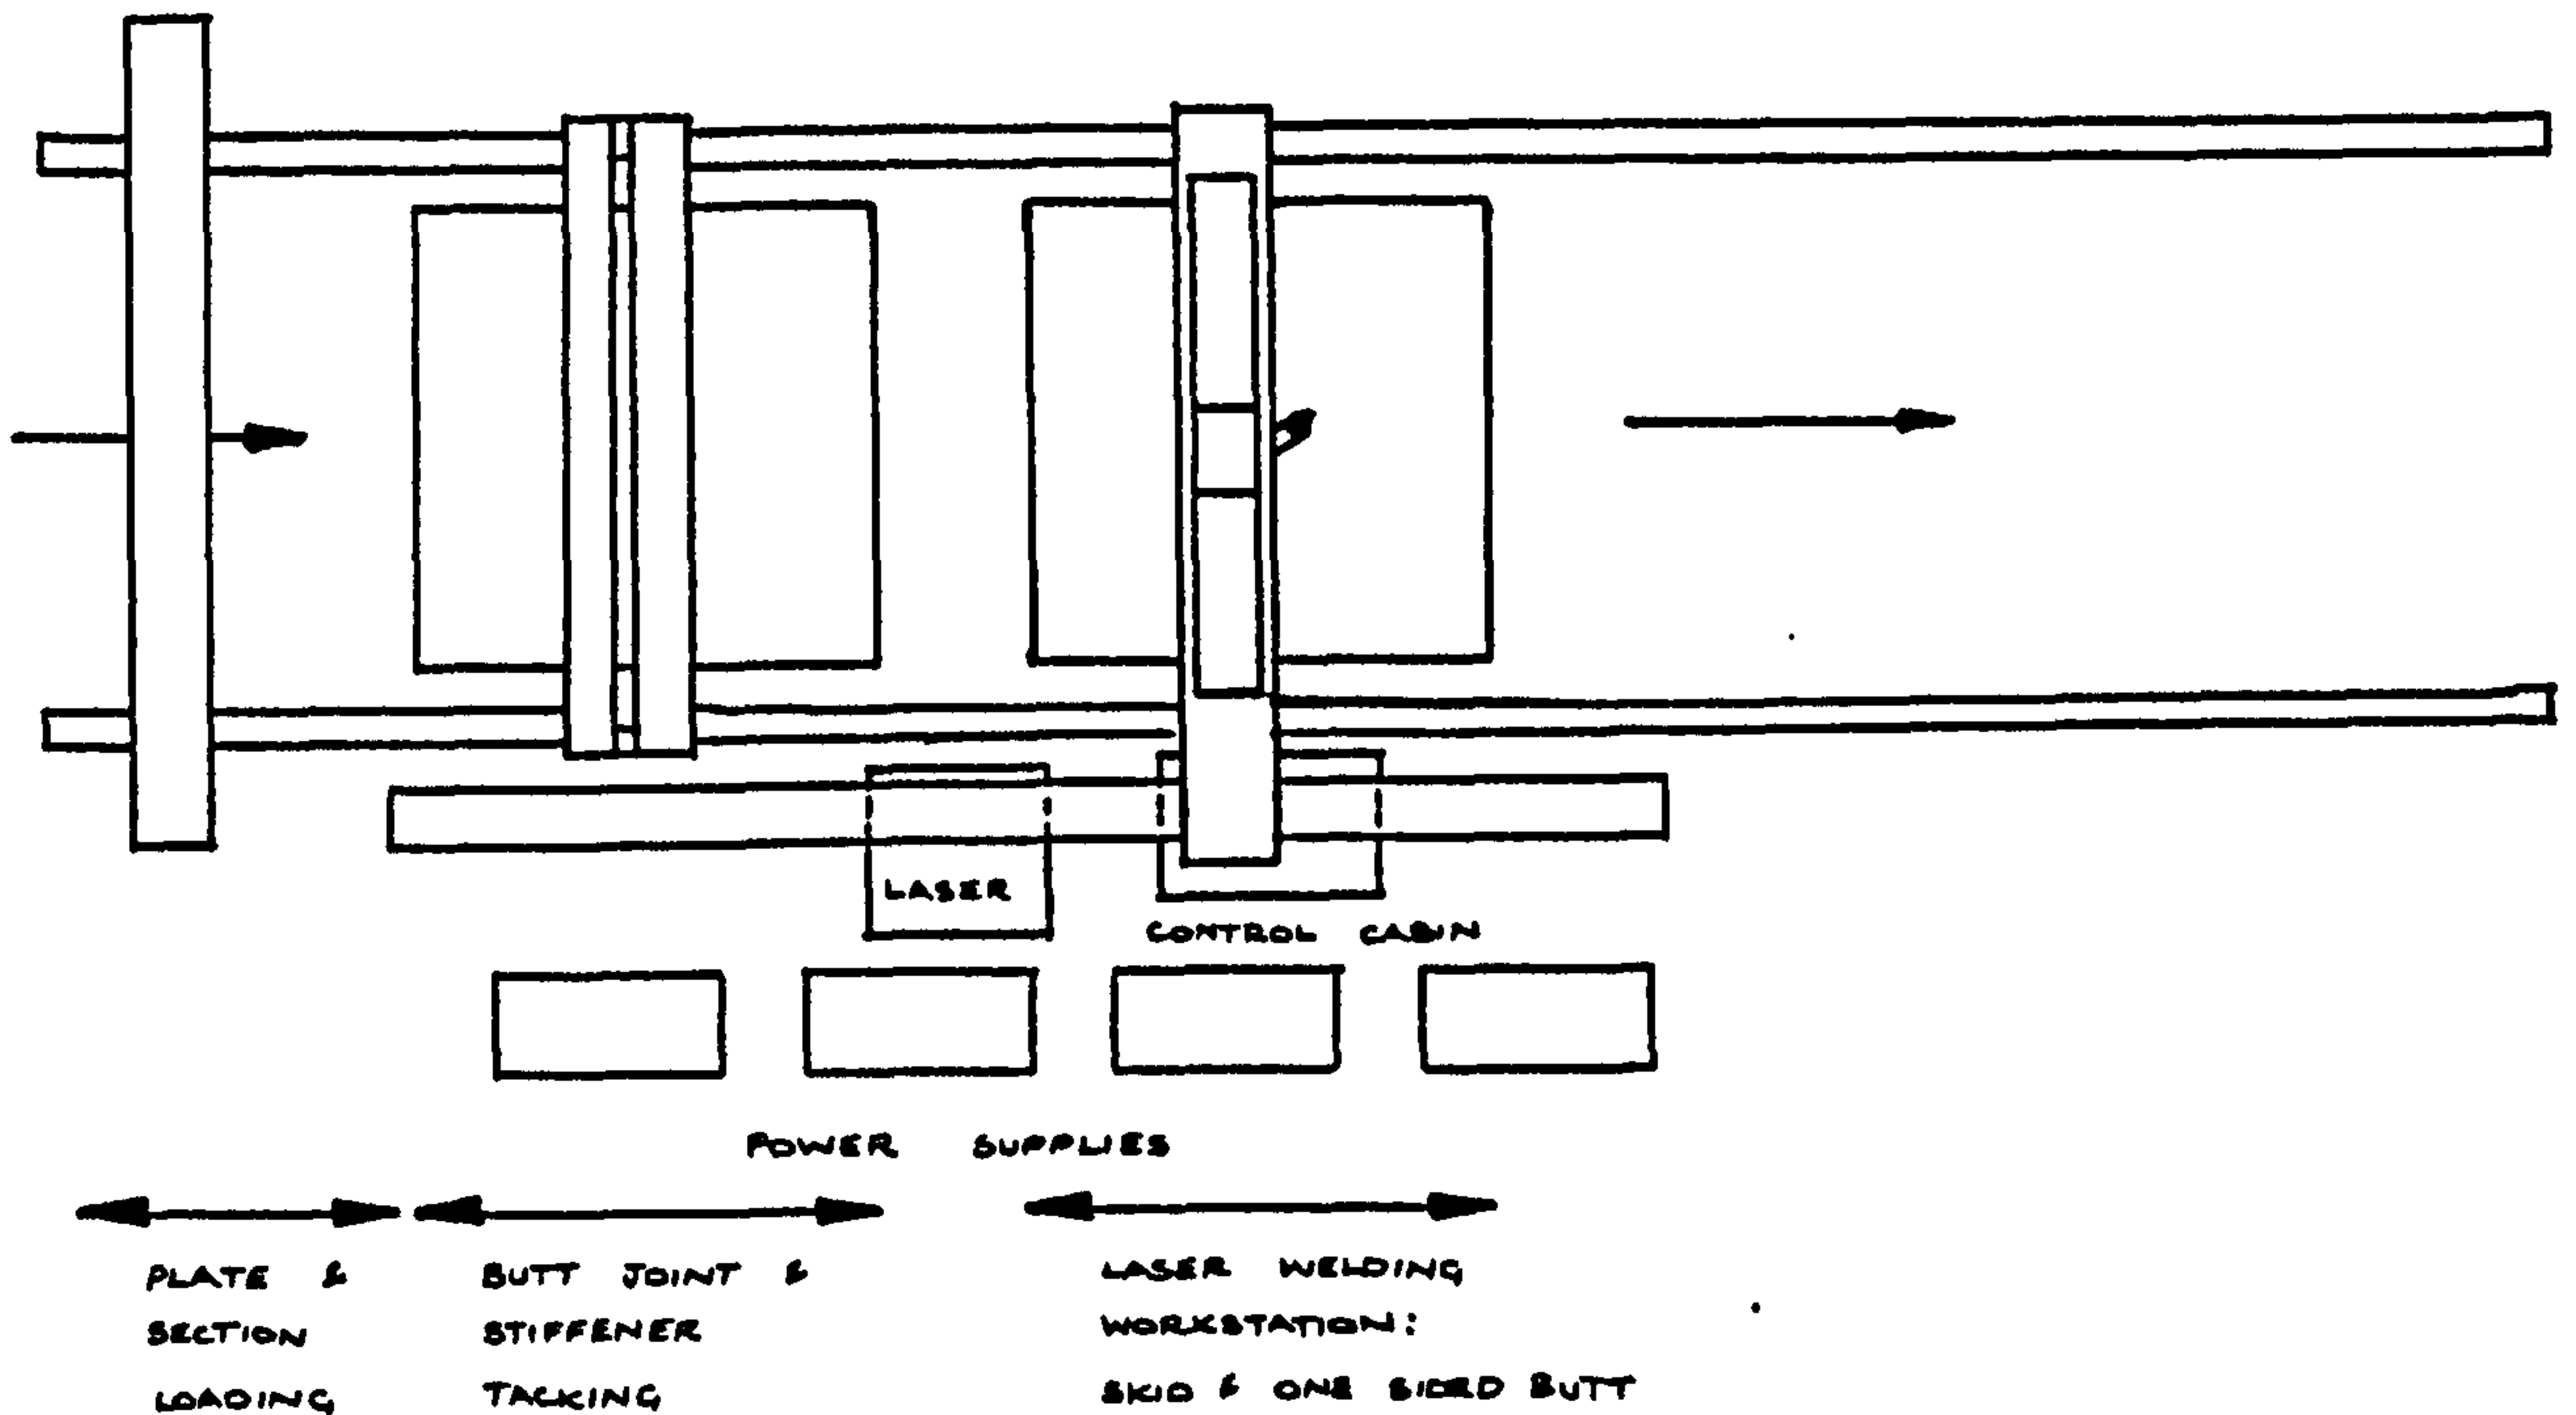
Flow line for a minor assembly facility using laser skid welding
